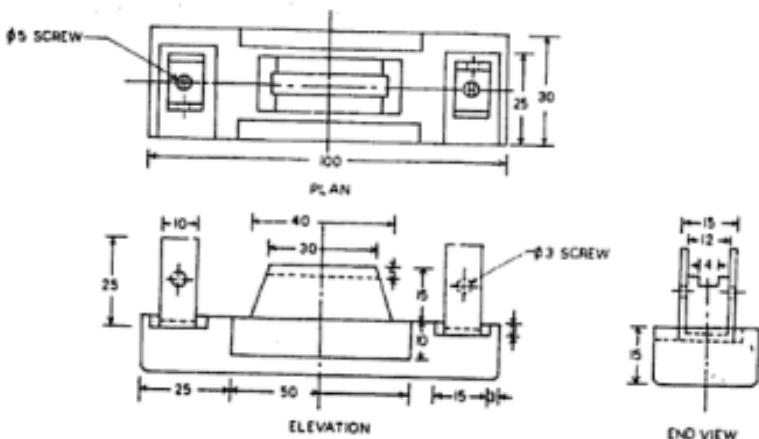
Three views of one part of a kit kat fuse assembly
